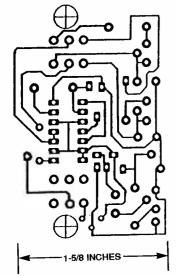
If you'd like to etch your own PC board for the Adapter, use this foil pattern.
